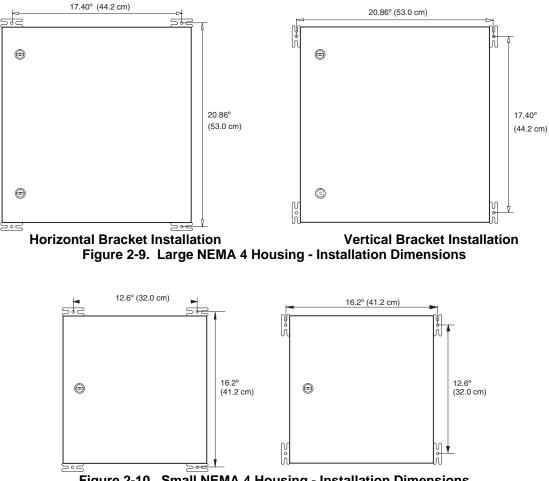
Small NEMA 4 Housing - Installation Dimensions
